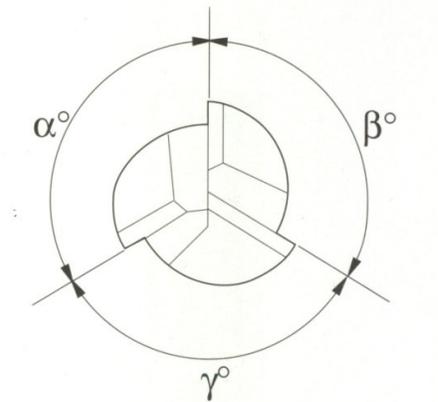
Cutting edges of “Piraña” end mills cutter
